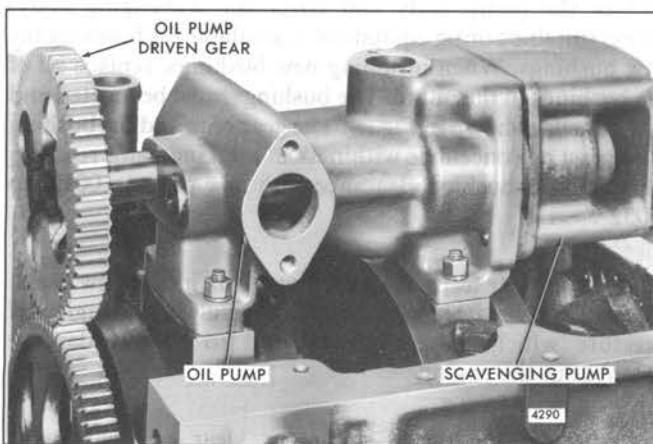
Oil Pump Mounting (6V-92 and 8V-92 Engine)
